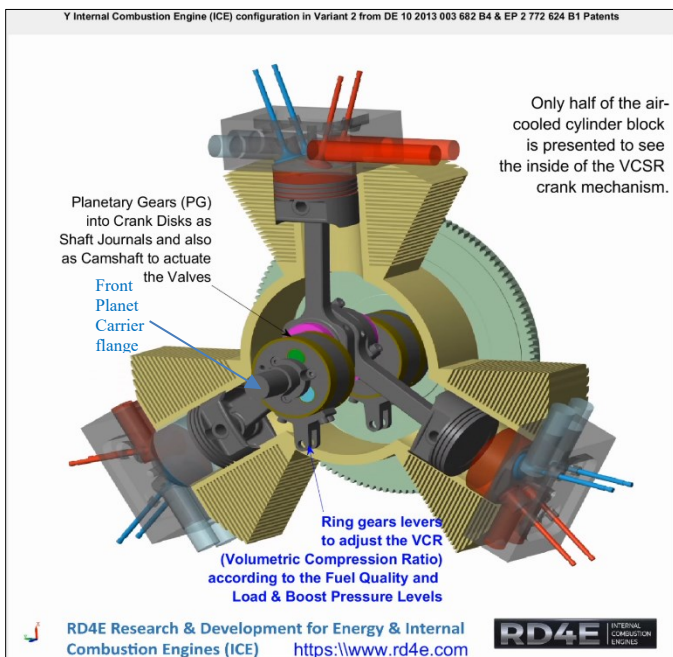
Full view of the 3Y crank mechanism, see a short video of it [23].
